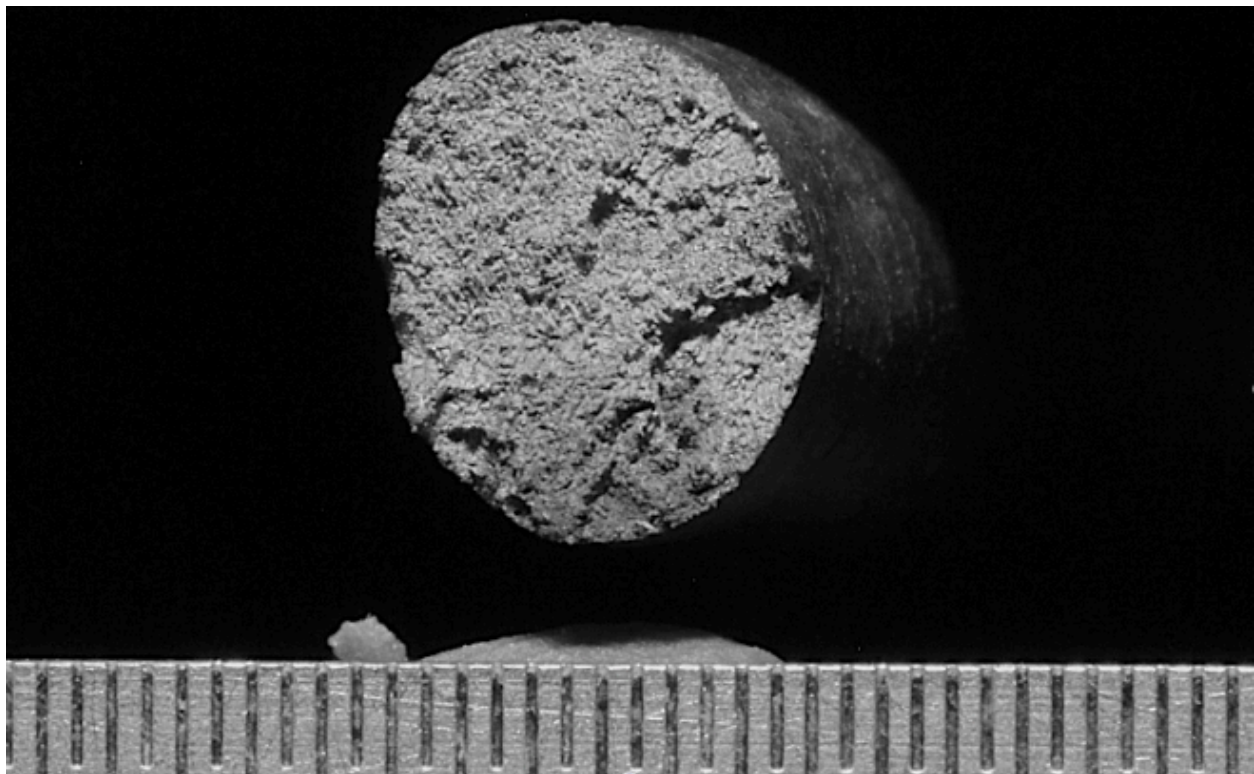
Macro-photographic image of the fracture surface of the specimen S7 halve demonstrated on the right-hand side in figure 42.
